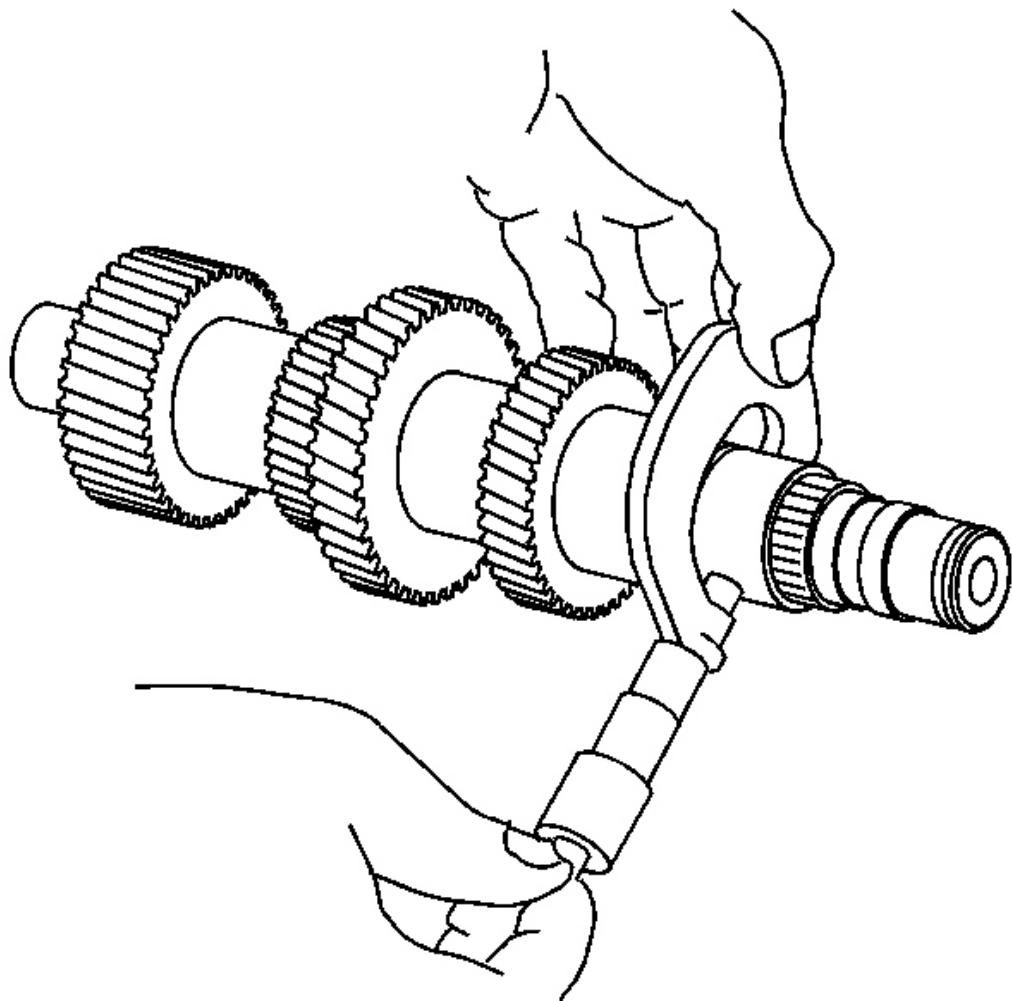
Measuring Outer Diameter Of Countershaft Journal
